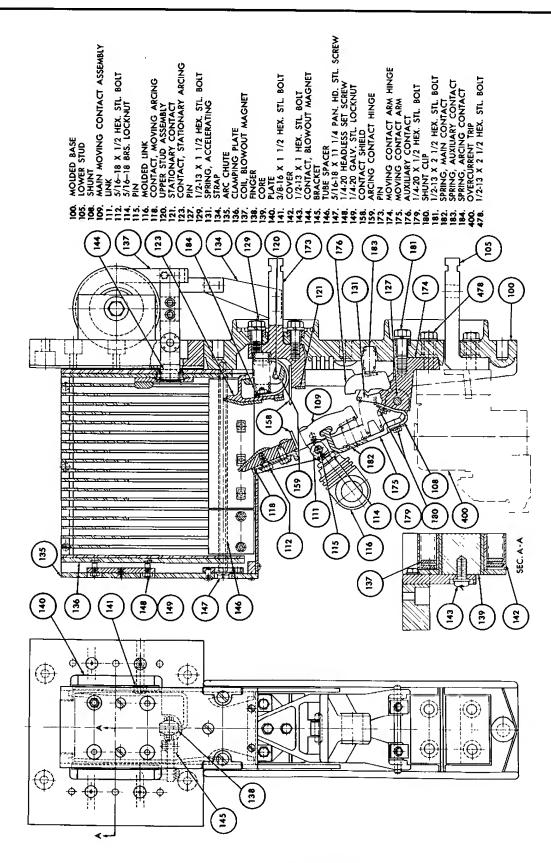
Air Circuit Breaker Pole Unit (Dwg. TP-55-485)
